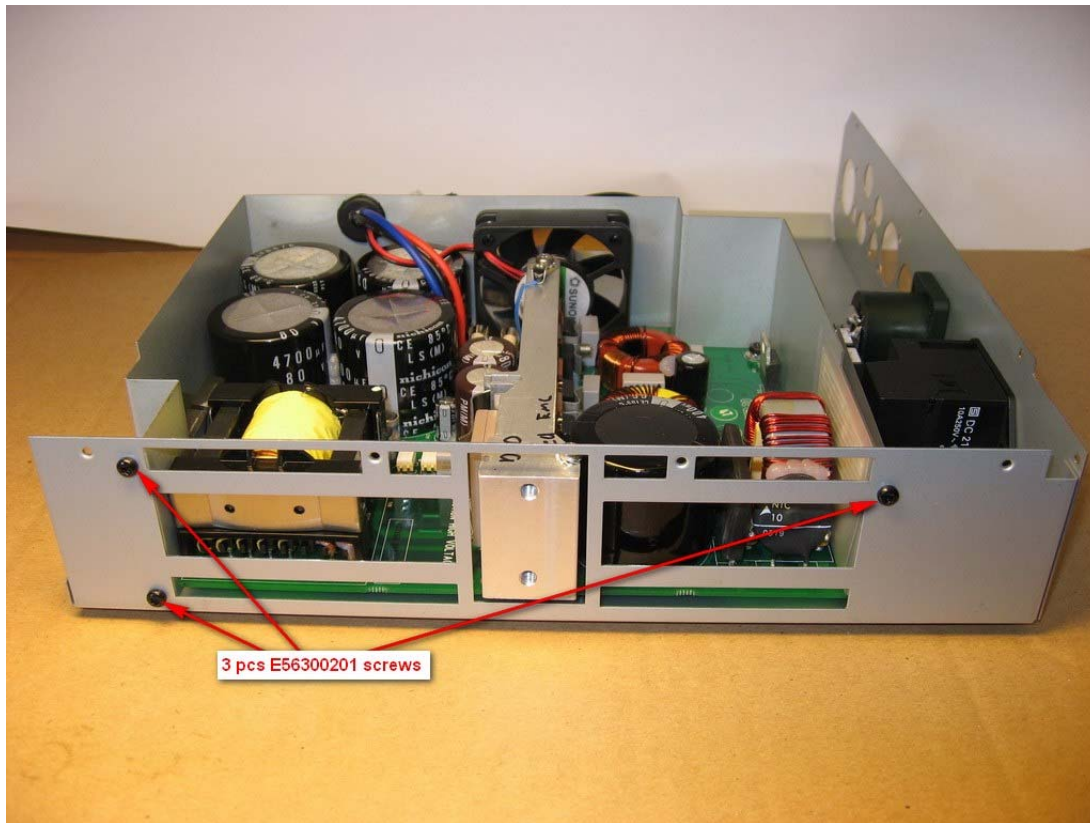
Use the three M2.5x4.5mm screws to mount the power screen to the inner box bottom.
